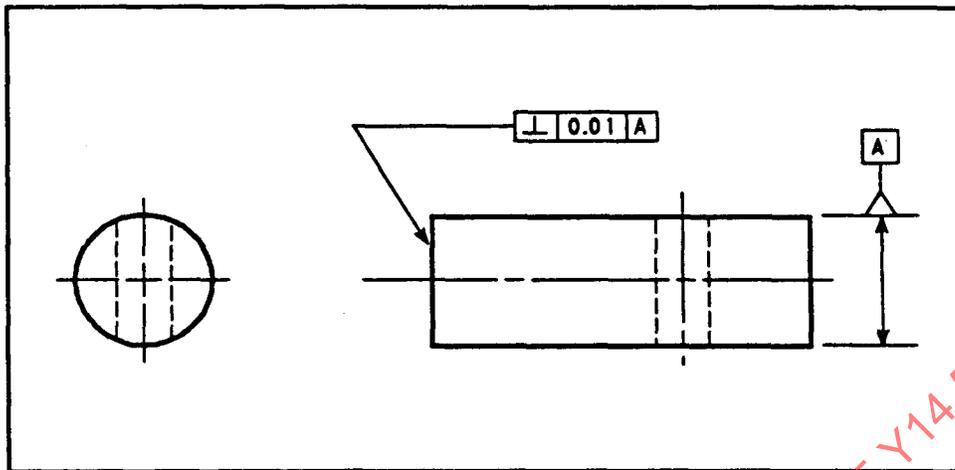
PLANAR PERPENDICULARITY OF A PLANE; PRIMARY DATUM AXIS; NO SECONDARY DATUM SPECIFIED. A SECONDARY DATUM WOULD PROVIDE NO ADDITIONAL CONTROL
